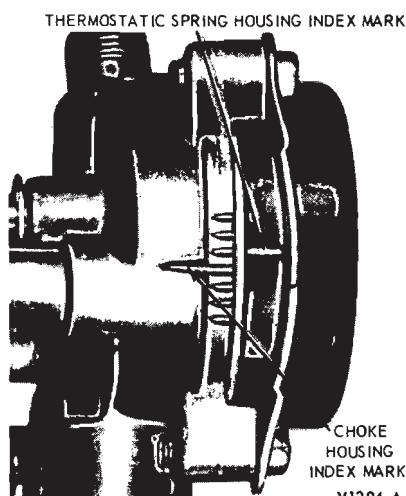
Automatic Choke Thermostatic Spring Housing Adjustment
